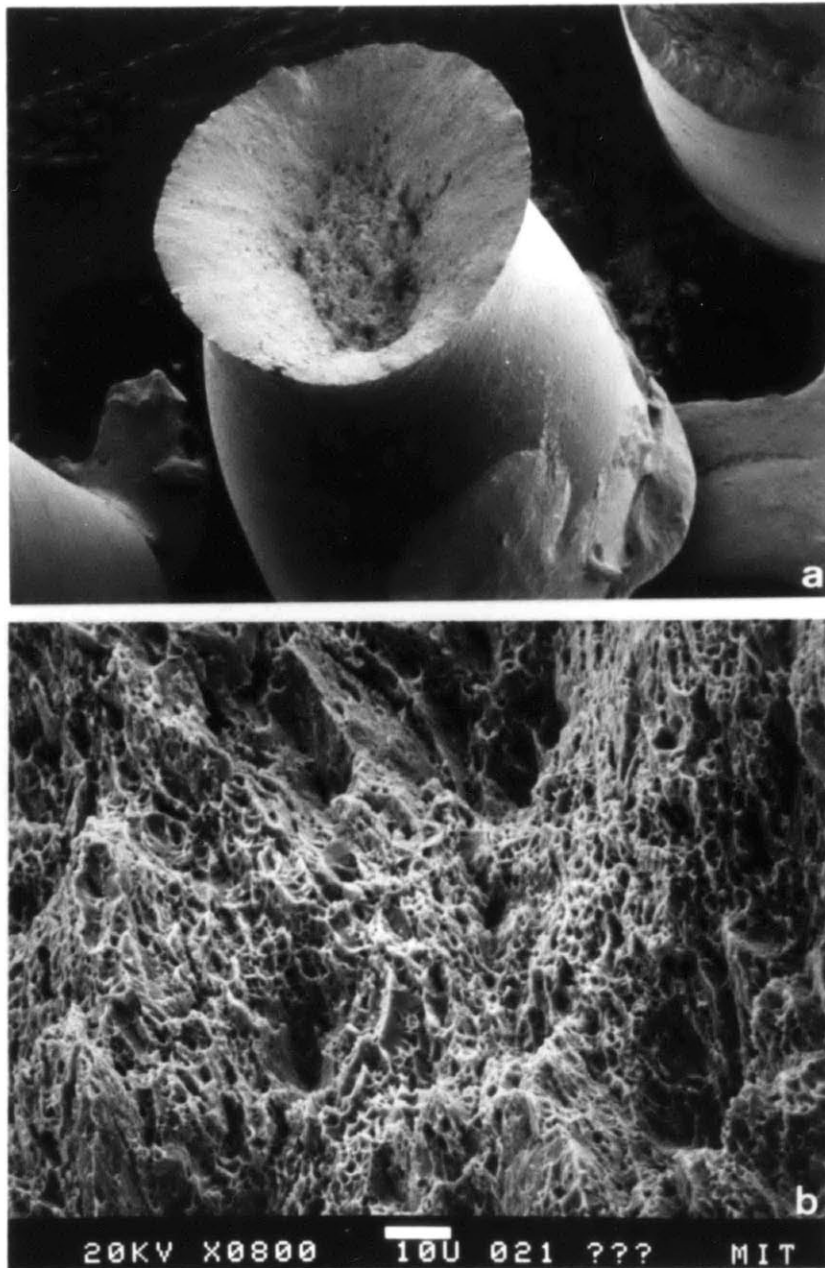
Typical cup-and-cone fracture surface with dimpled topography in the 0.5Mn-0 alloy tested at 250°C.
